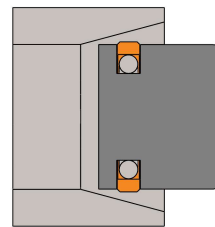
Remove pusher tool and stretch cone. Place resizing sleeve onto piston.
